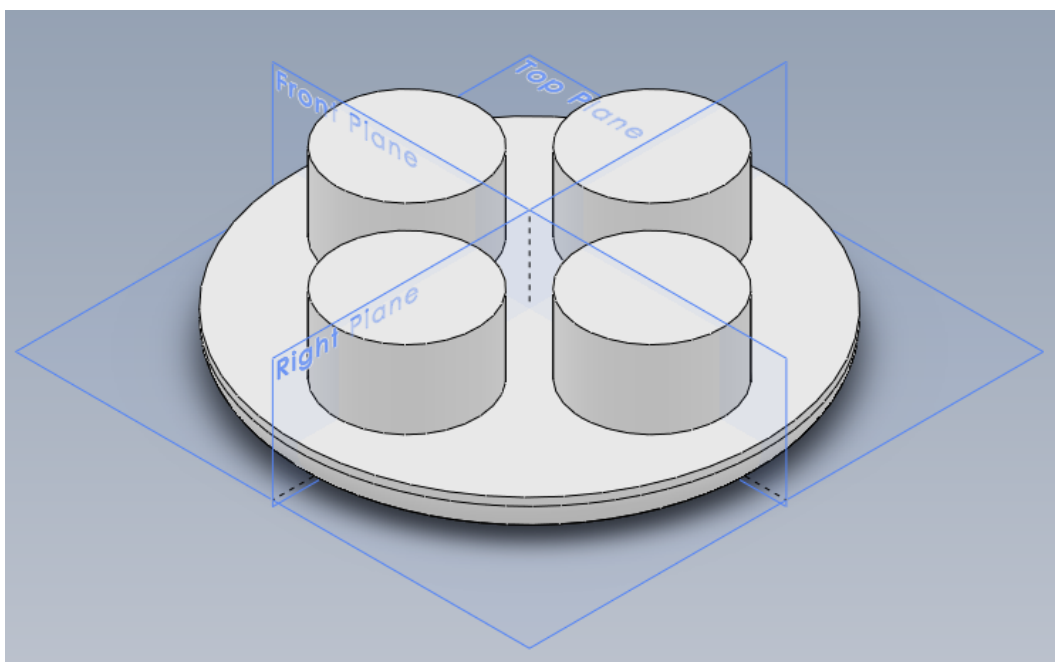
Specimen Set-Up Disk for Rotation Assembly
